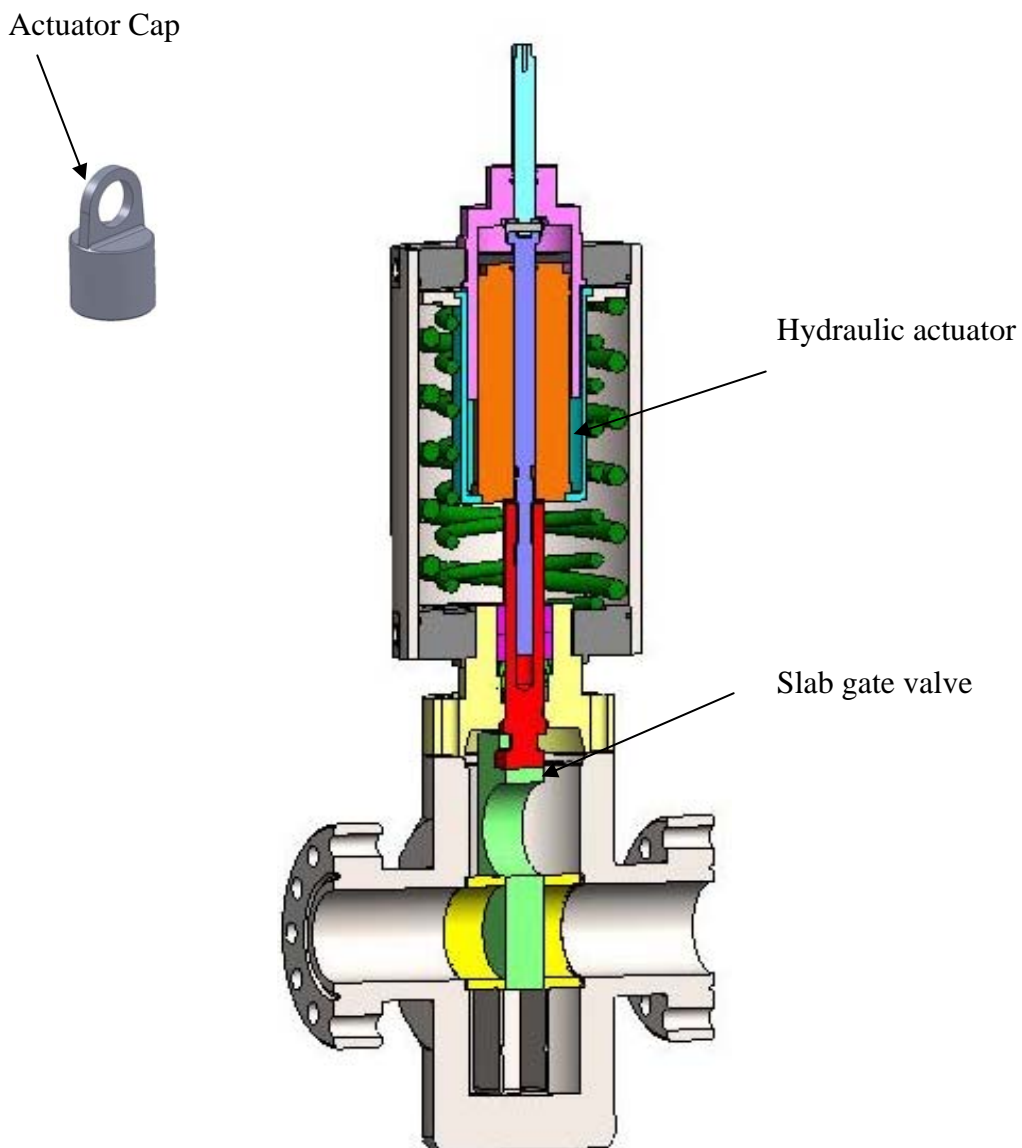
Hydraulic Actuated Gate valve (Safety Valve)
